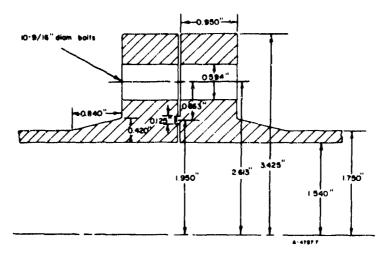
INTEGRAL-TYPE FLANGE GEOMETRY (RENÉ 41 + 1500 F)
